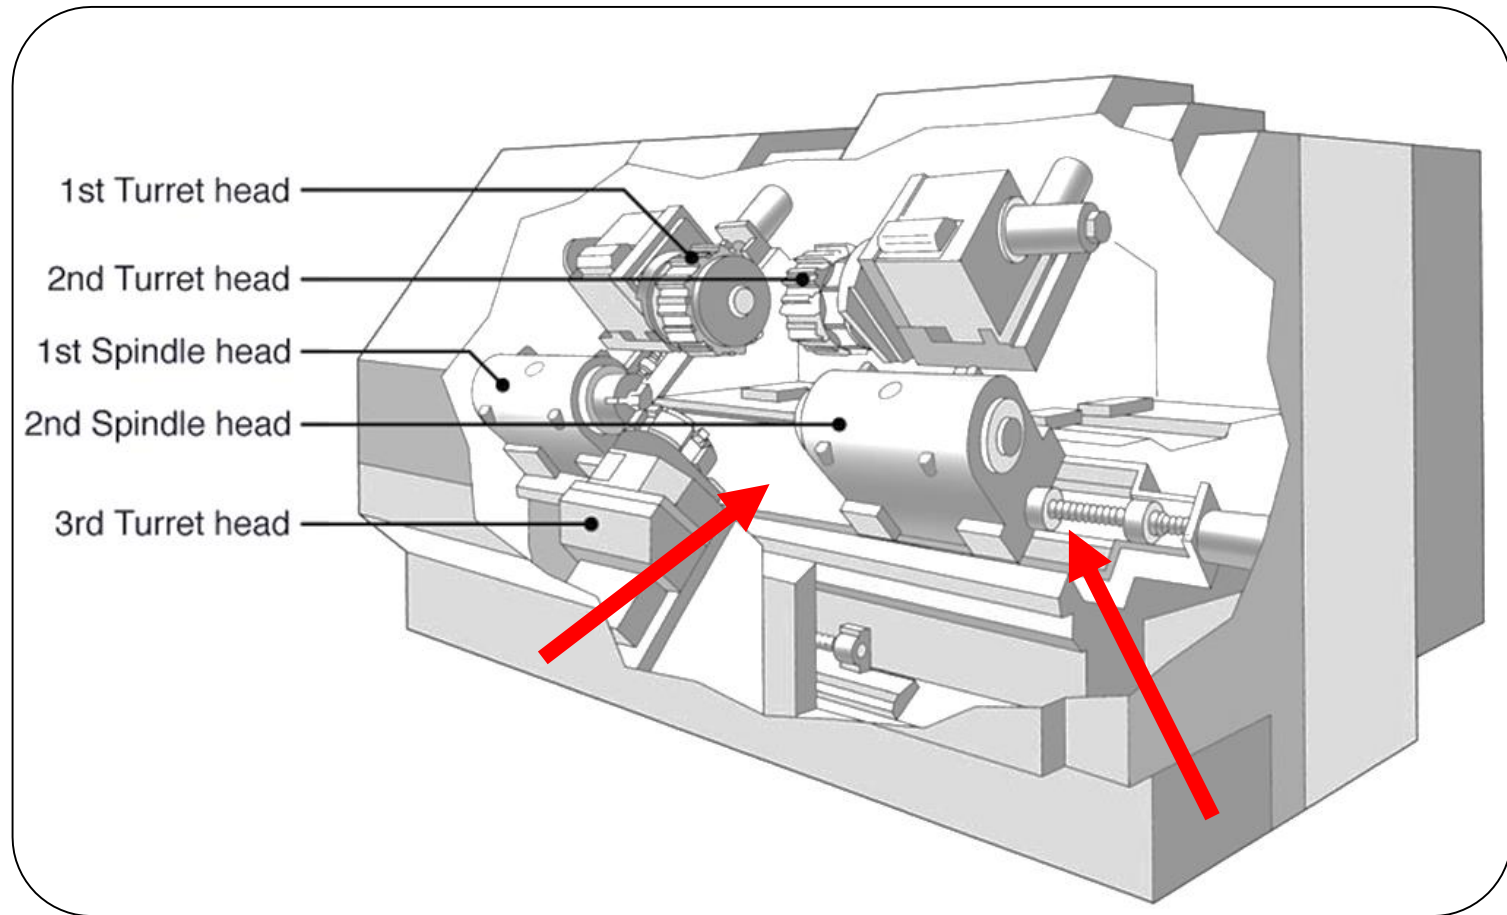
Schematic illustration of a computer numerical-controlled turning center. Note the slant bed arrangement (Manufacturing, Engineering & Technology, Fifth Edition, by S.Kalpakjian and Steven R. Schmid.)
